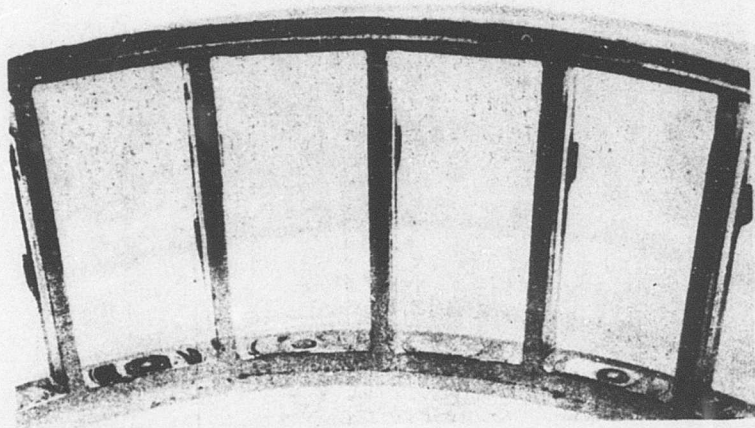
View of Cage Pockets - Bearing S/N 73-73.
